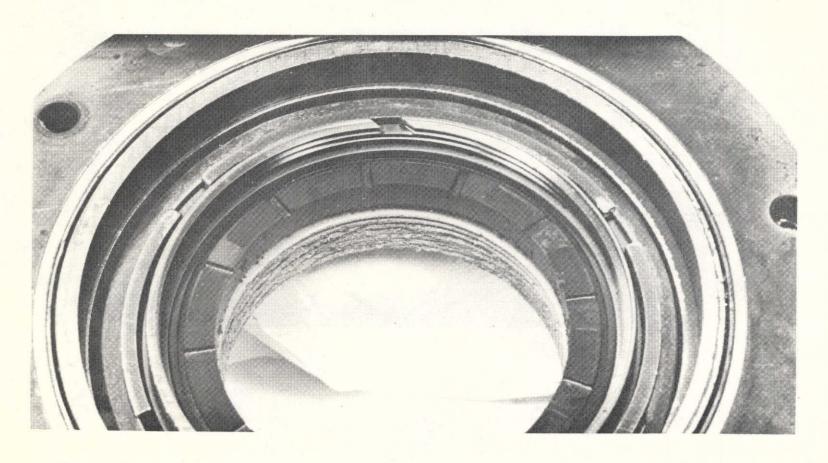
Aft Seal After Sand and Dust Test IV Viewed From the Oil Side.
